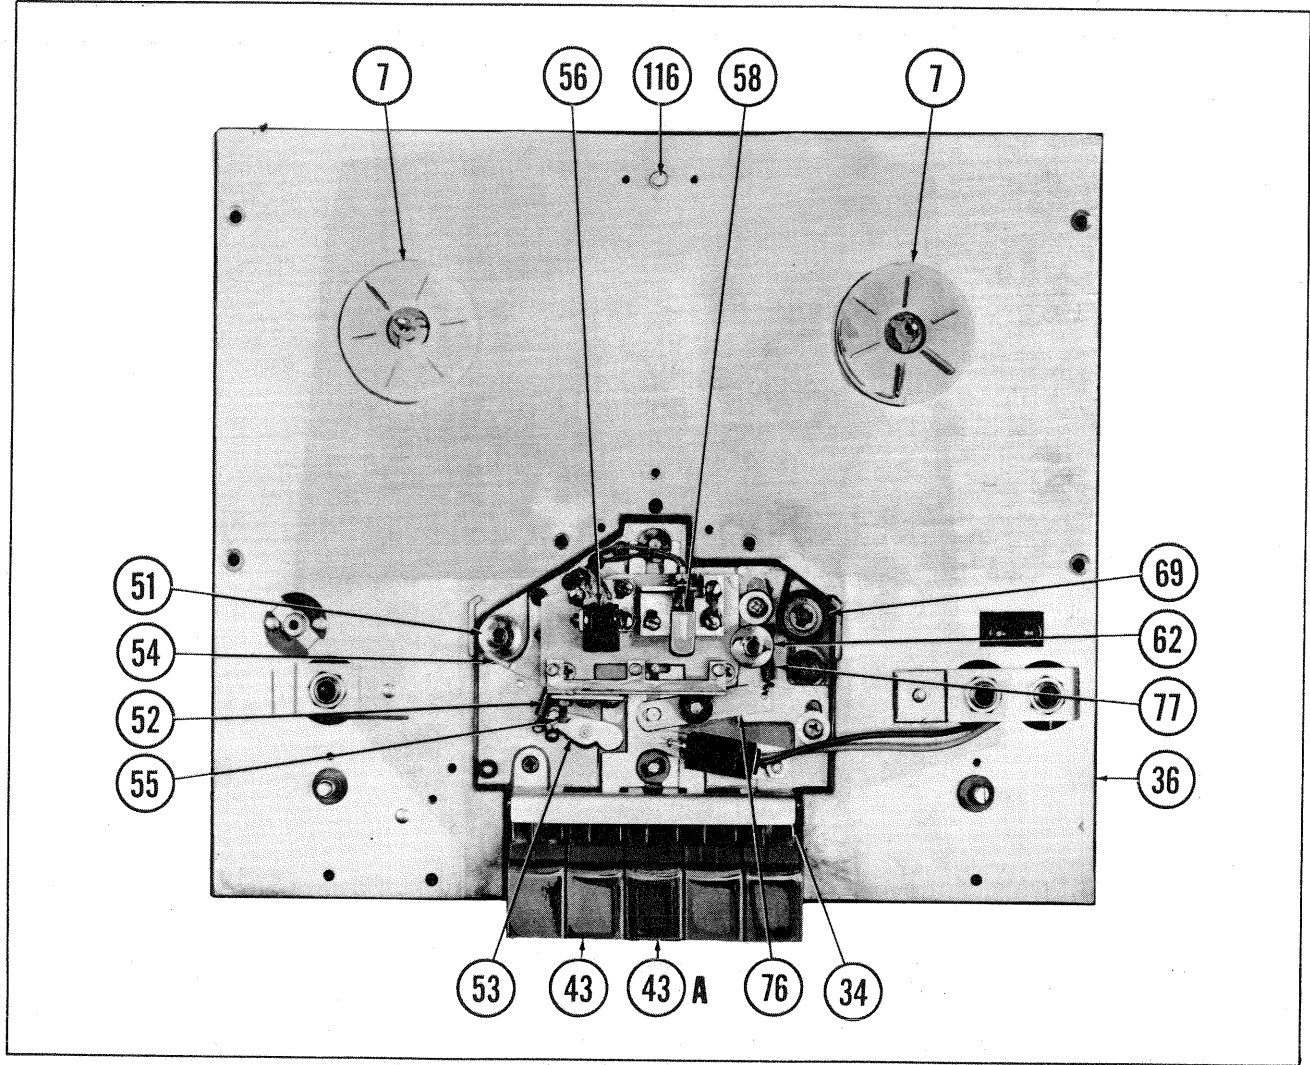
TOP VIEW OF MECHANISM WITH ESCUTCHEON REMOVED
